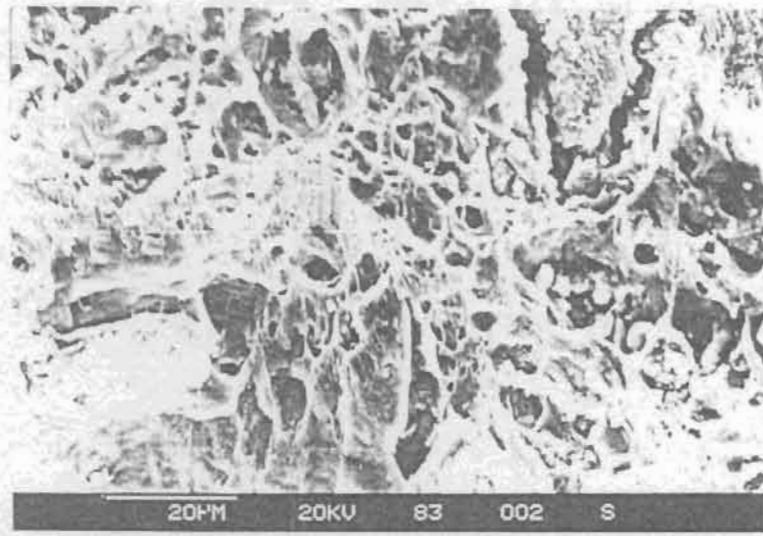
Fractograph of tensile fracture on SE rod. Shows formation of microvoids and dimples and particle debonding within the dimples.
